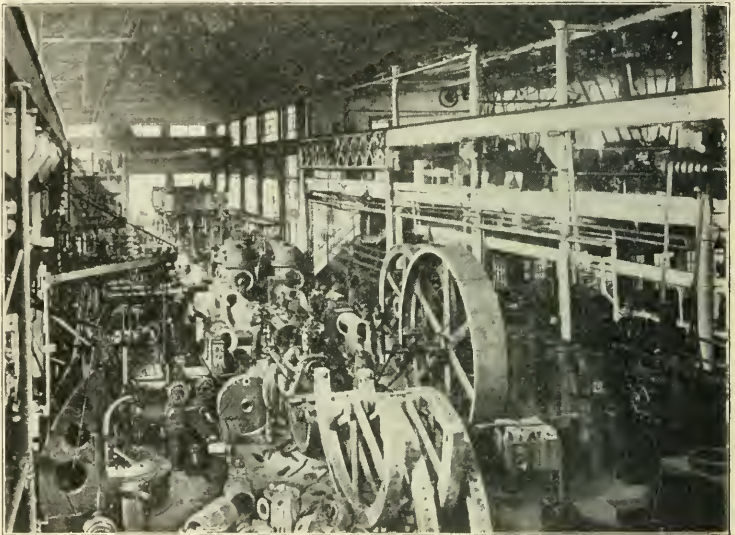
This is an interior view of the iron works at Burlington, where many boilers, tanks, engines, and other kinds of machinery are made
